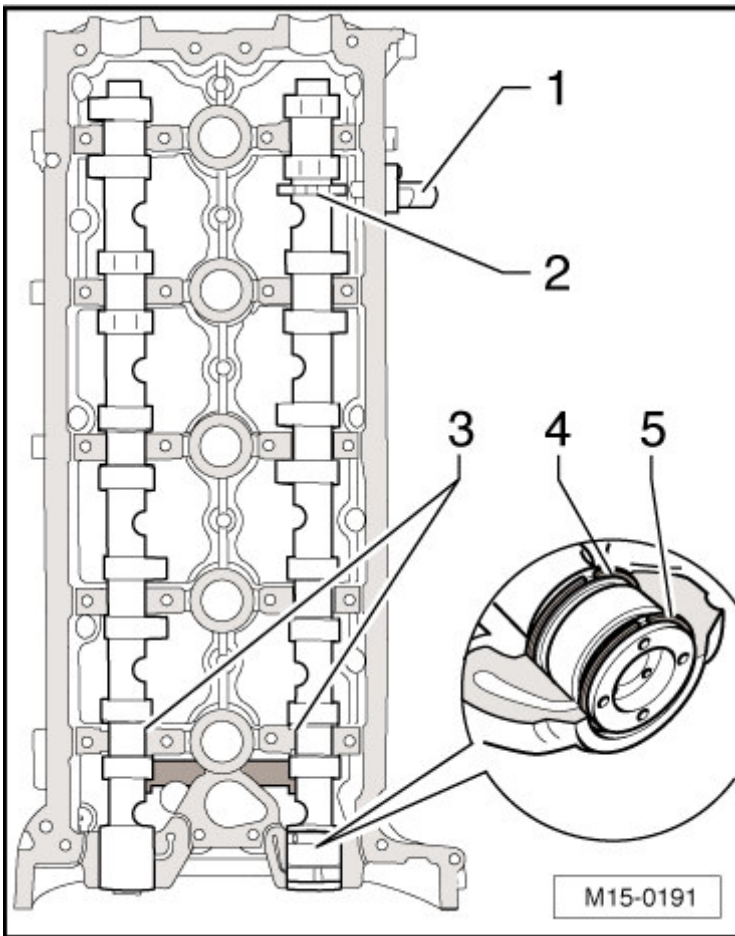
Inserting Camshafts Correctly Into Guide Frame
